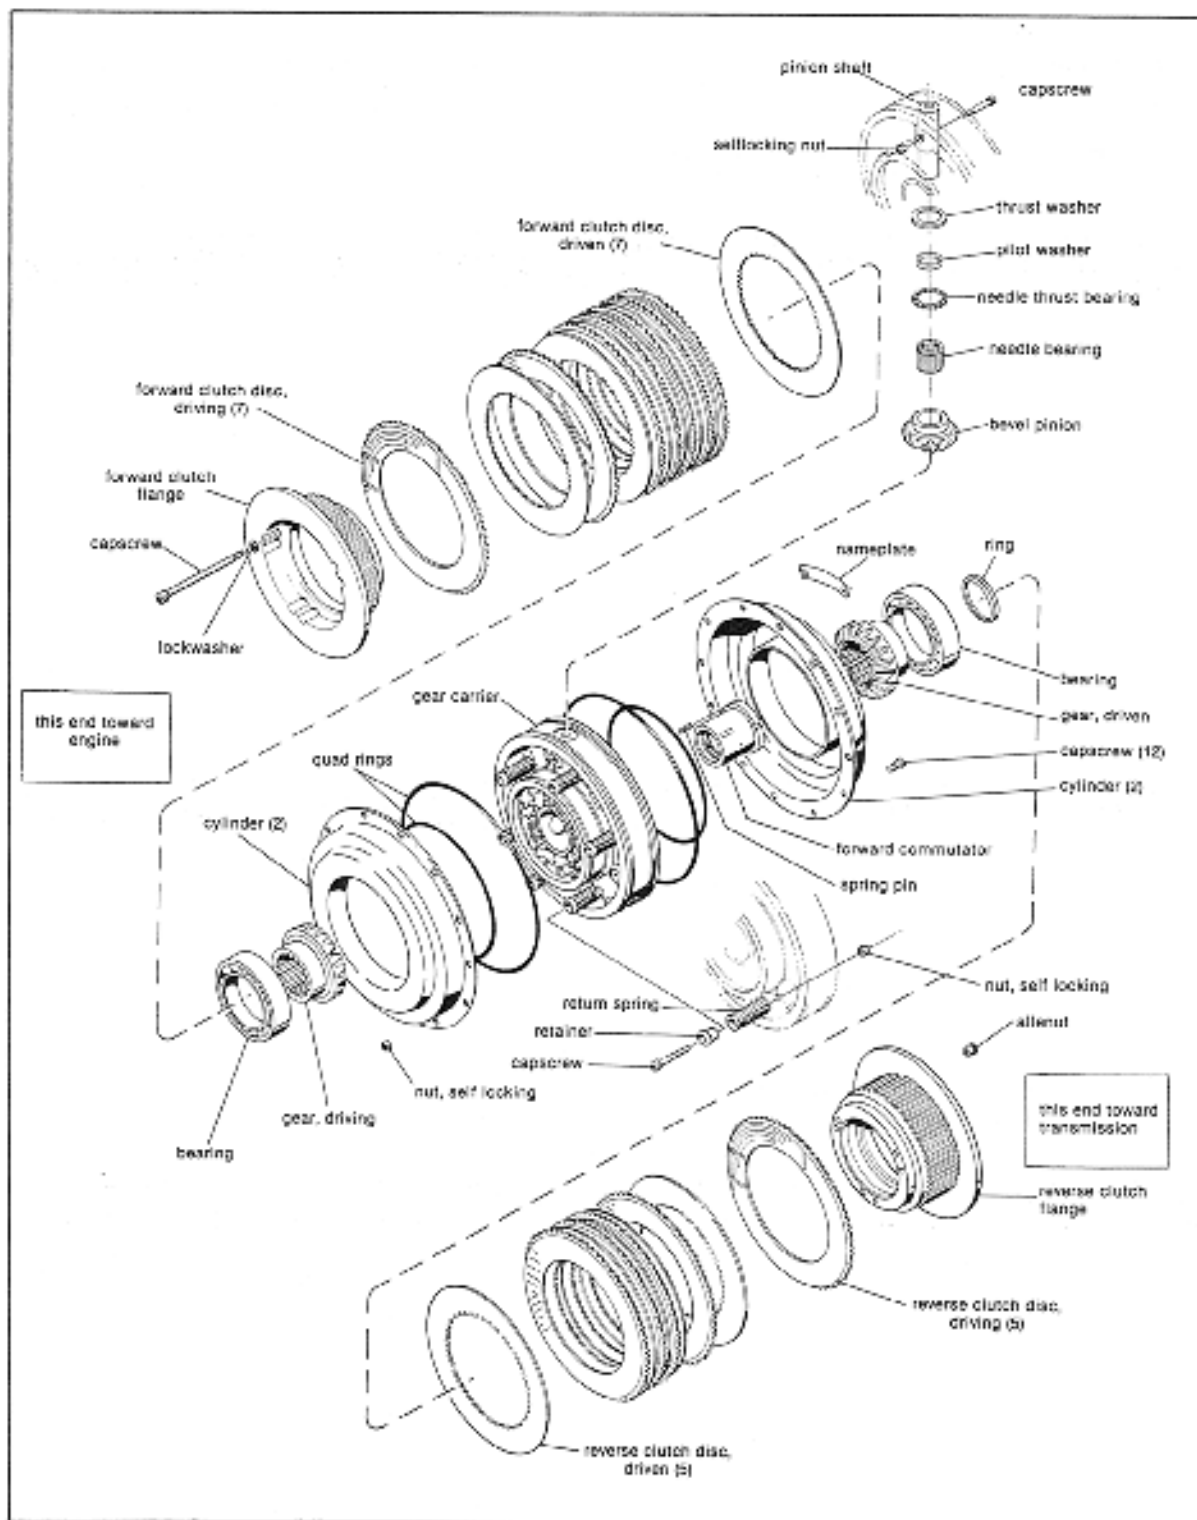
Exploded View of Standard Clutch Assembly No. 1-00100-1300. PTO clutches No. 1-00100-1103 and No. 1-00100-1104 are shown on pages 36 and 37 respectively.
